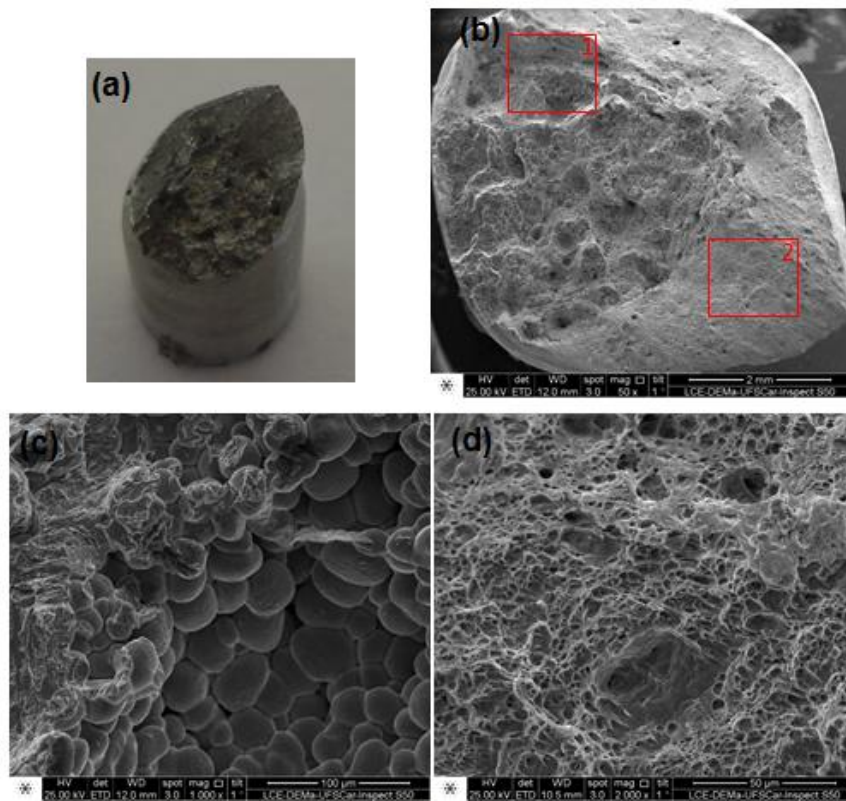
(a) Photography and (b) SEM image of the 45 degrees fracture (specimen 1) of the as-spray formed SMSS. (c) Shrinkage solidification pore and (d) dimpled fracture surface.
